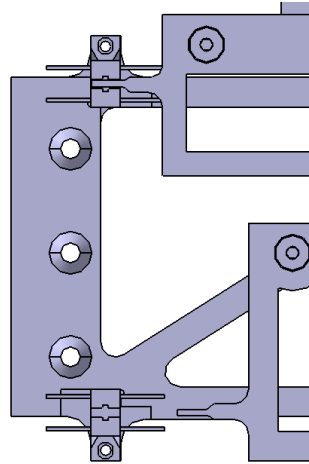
Limit switch mounting and interface with the bar assembly.
